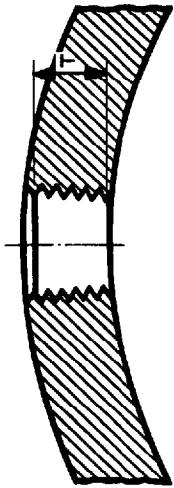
THREAD LENGTH FOR CONNECTION TAPPING¹
